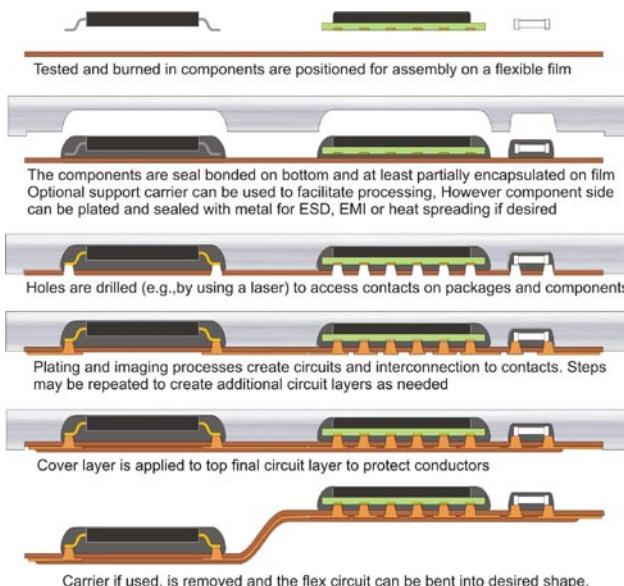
The Occam process applied to flexible circuits offers some unique design and assembly possibilities.
